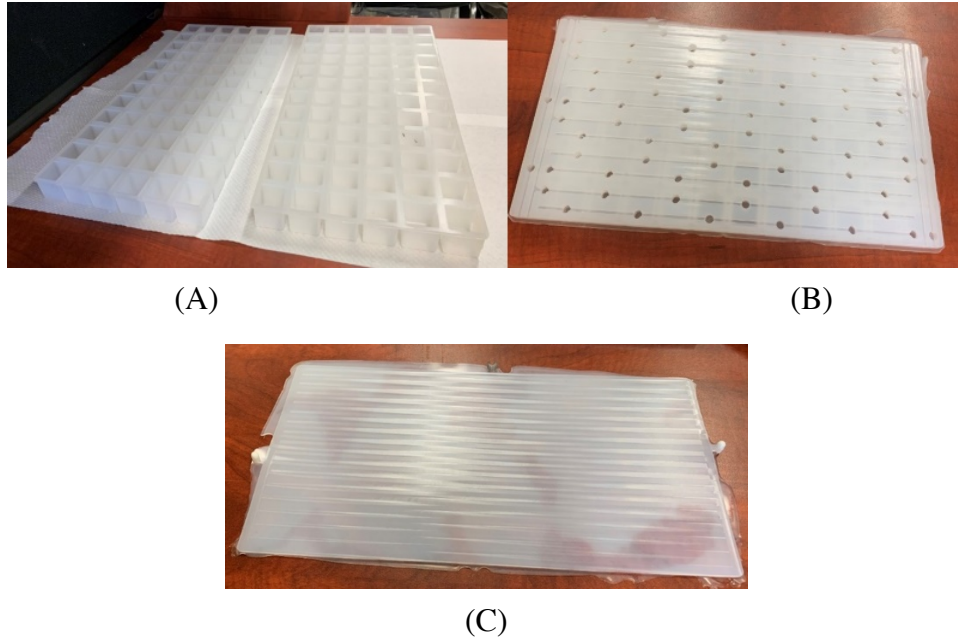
The components of each air pocket section. (A) is the silicone air pockets, (B) is the air lines and (C) is the bottom component sealing in the air pockets. All components were glued together with silicone. Each section of air pockets contains 72 air pockets (total 288 air pockets) in a 1-in-4 cycle, allowing staggered air pockets to be deflated to maximize the contact area.
